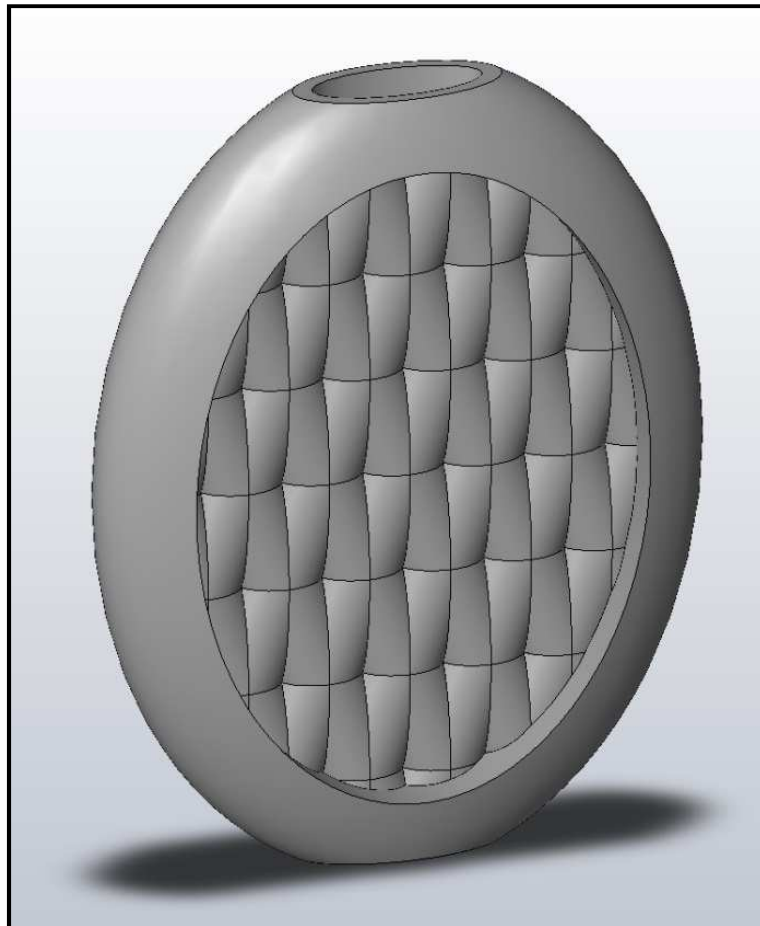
Solid mesh vessel 4: 3-D CAD Design, 75 mm x 20 mm x 100 mm
